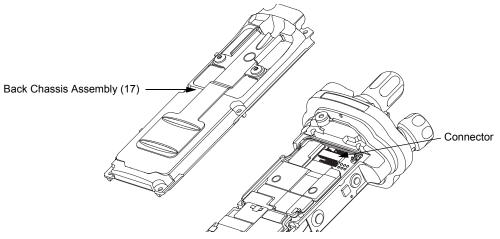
Remove Back Chassis Assembly from Main Chassis Assembly
